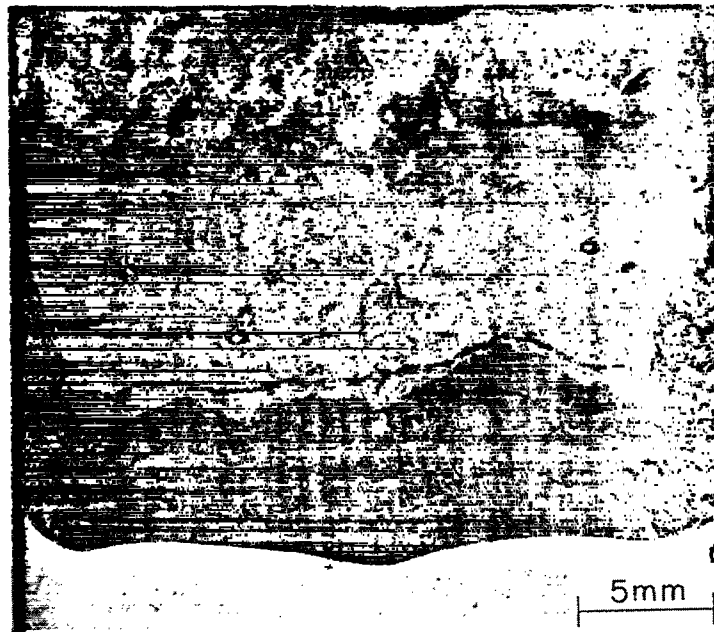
Fracture surface of specimen Q, the HY-180 fine-bead tempered weldment
